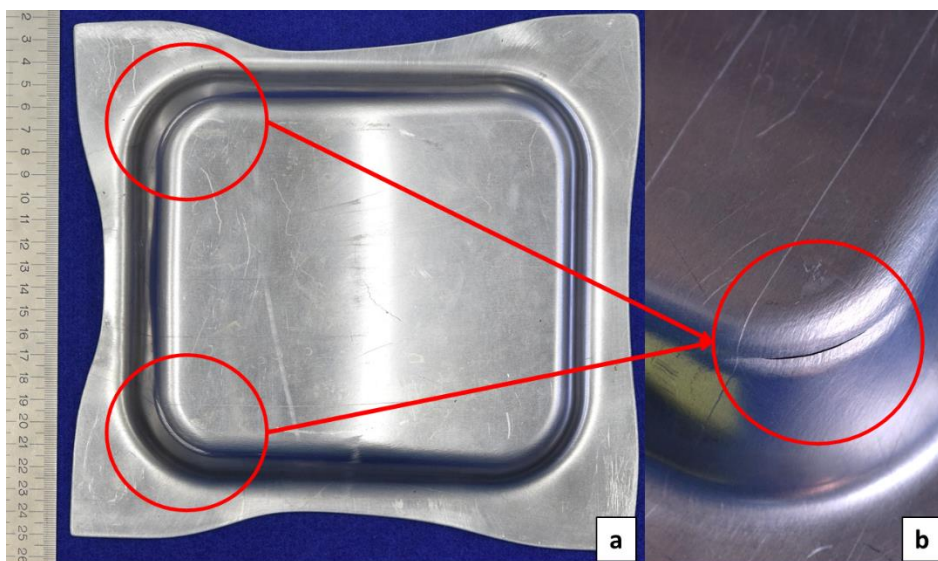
15: fractures zone on blank B4 (a) with a detailed view (b).
